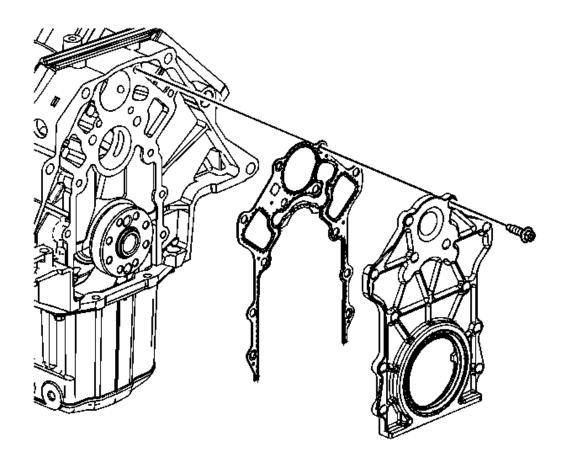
Crankshaft Rear Oil Seal & Housing (Second Design) Courtesy of GENERAL MOTORS CORP.
